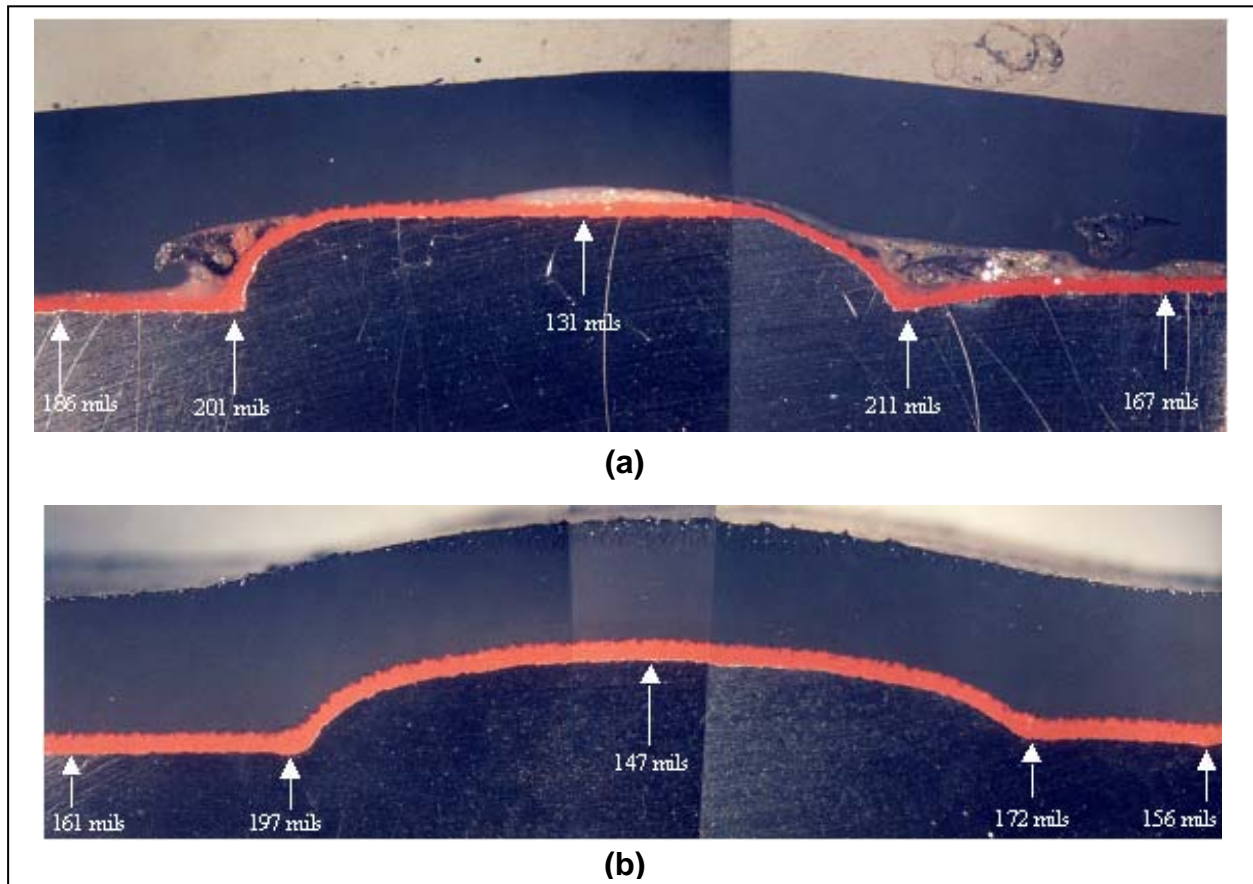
Cross Section of Weld Seam obtained from (a) Conventional 3LPO Coating Process; (b) New Approach to Multi-Layer PO Coating
